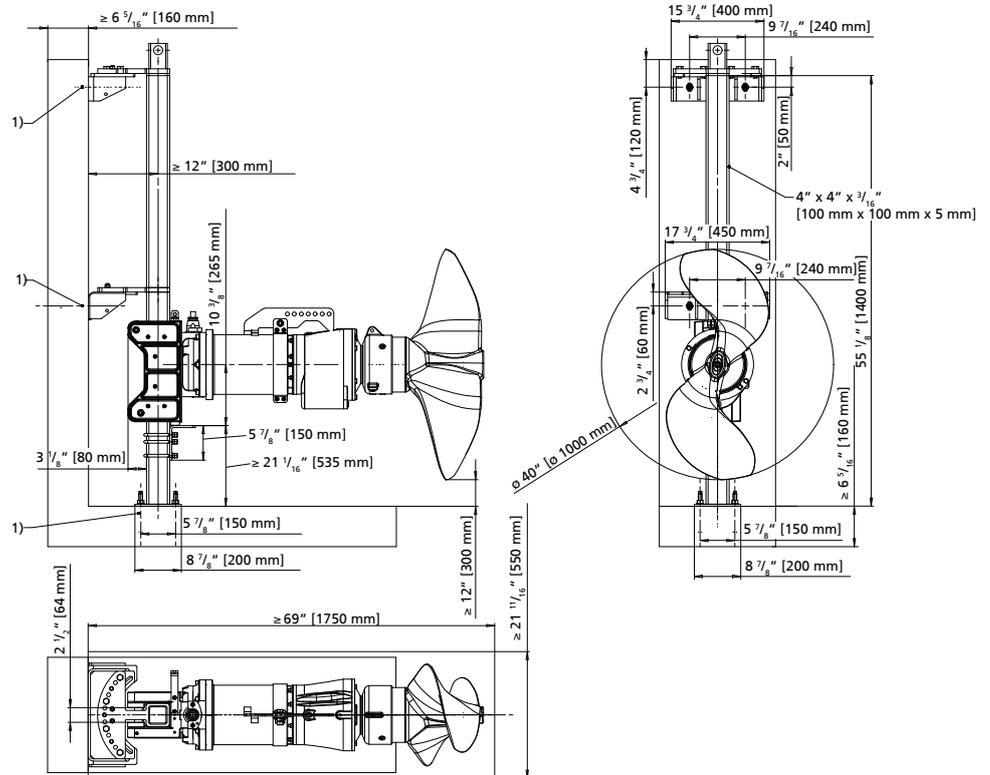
Installation of accessories 22 - AmaProp 802 and 1002 (Ø 800 mm / Ø 1000 mm)
